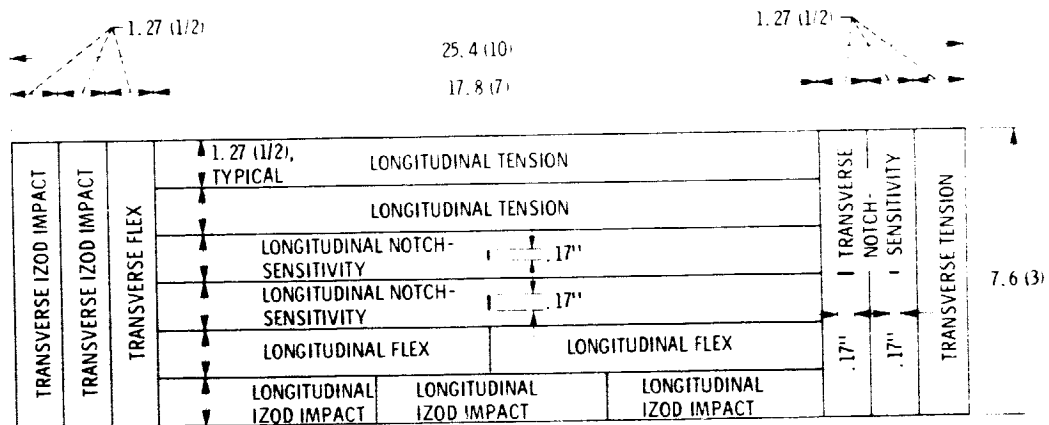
Typical specimen layout plan. (Nominal values. All dimensions are in cm (in.).)
